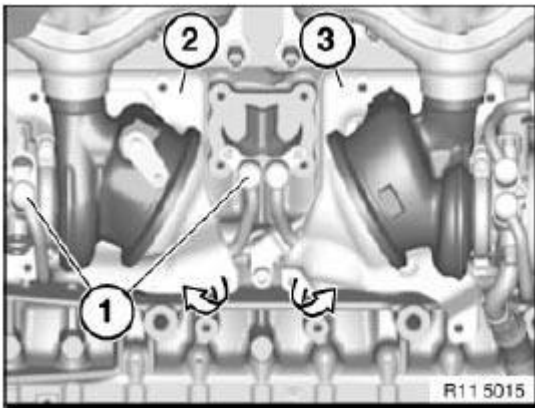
Identifying Heat Shield And Coolant Feed Line
